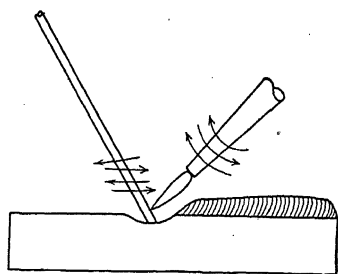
Whipping technique used in aircraft welding.
